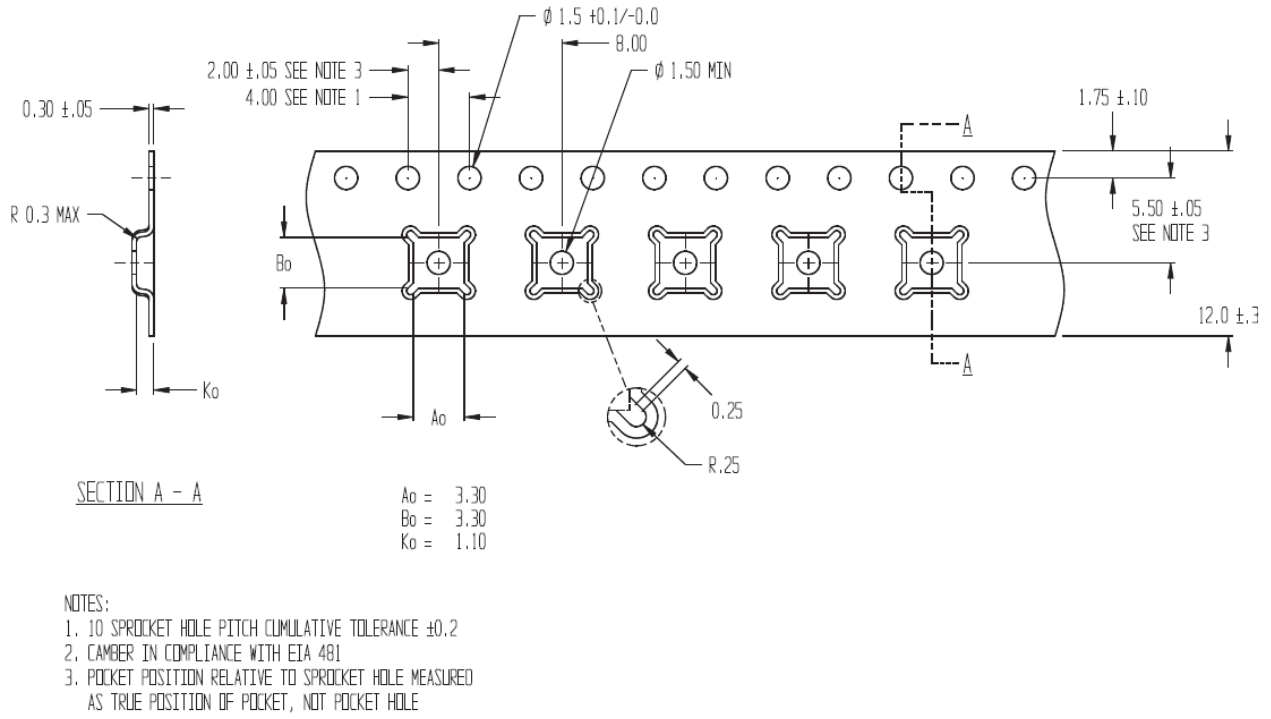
Tape and reel specification for the 20-lead 3.0 x 3.0 mm QFN package
